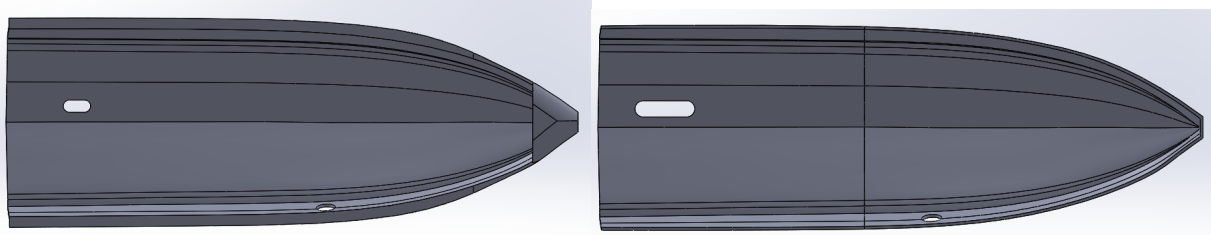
CAD model of modified boat hull design (Left), original boat hull design (Right)
